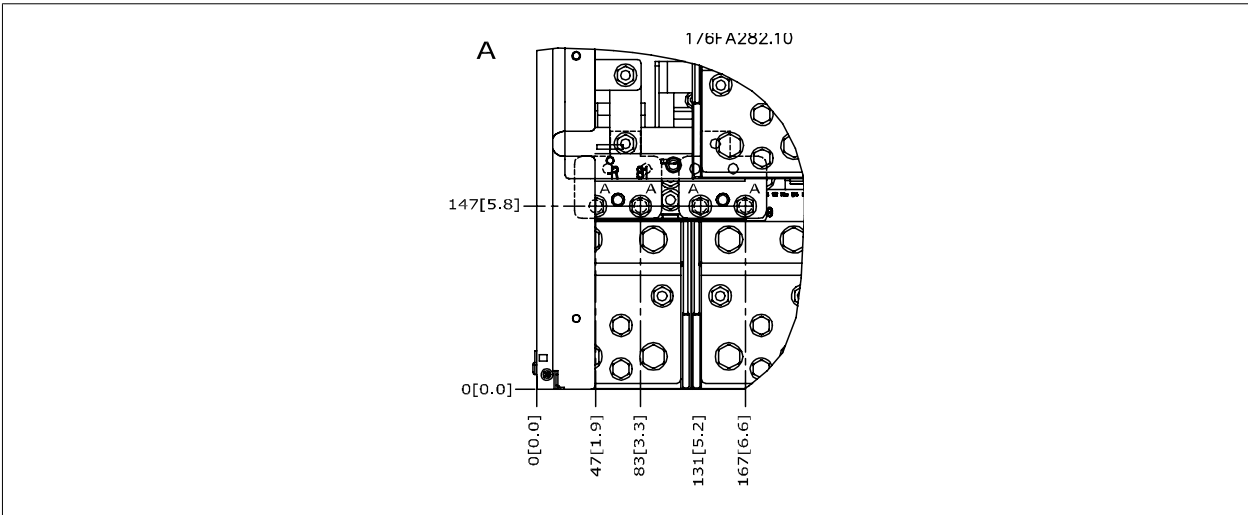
IP00 Open Chassis drive type power connection positions
